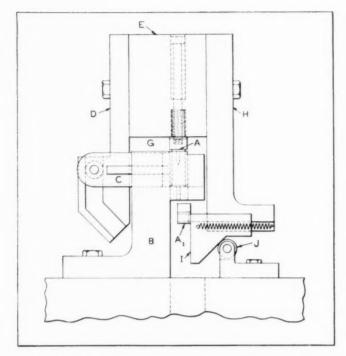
Die Shown in Fig. I as it Appears in Closed Position about to Eject Finished Piece at A₁
